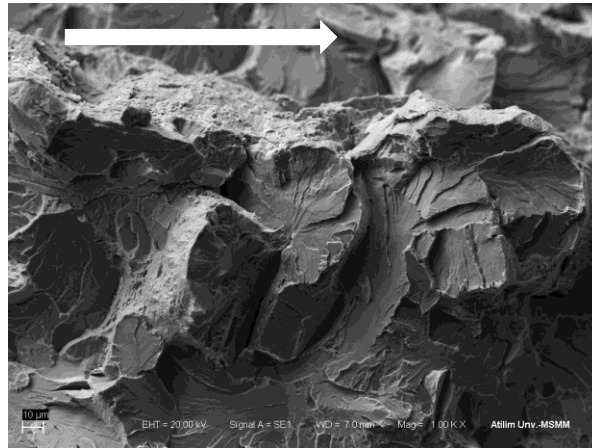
Brittle cleavage final fracture and river markings in each grain. (X 1000)
